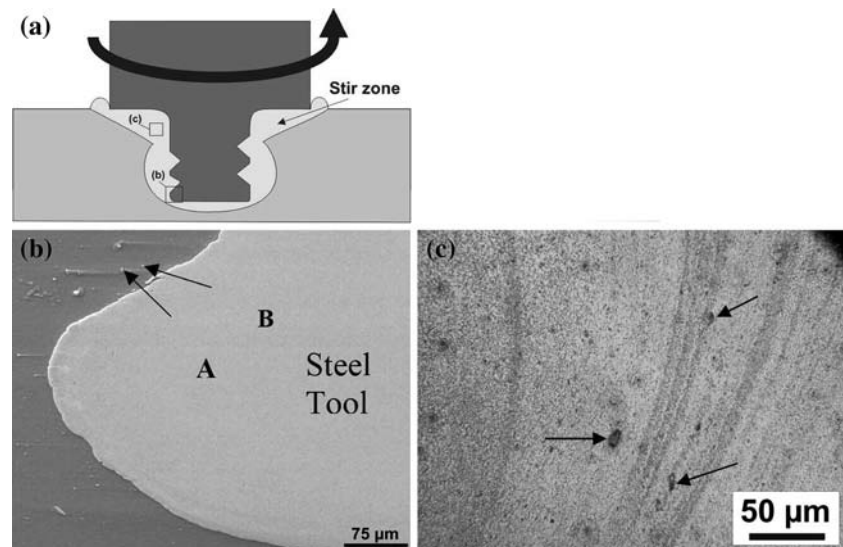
(a) Schematic of friction stir spot weld and tool during spot welding, showing locations examined at the root of the pin thread in Fig. 6b and c. (b) Material at the root of the pin thread in rapidly-quenched AZ91 spot welds made using a plunge rate of 25 mm/s, a tool rotational speed of 3,000 rpm showing the microstructure (in a 0.25 s dwell time spot weld) and an SEM micrograph (in a 0.75 s dwell time spot weld). (c) SEM micrographs showing material located at the root of the pin thread in rapidly-quenched AZ91 spot welds made using dwell times of 0.25 and 0.75 s. The chemical composition at each location is: Element wt% Mg, Location A—83.3, Location B—80.9, Location c—79.8; Element wt% Al, Location A—11.7, Location B—19.1, Location c—20.2
